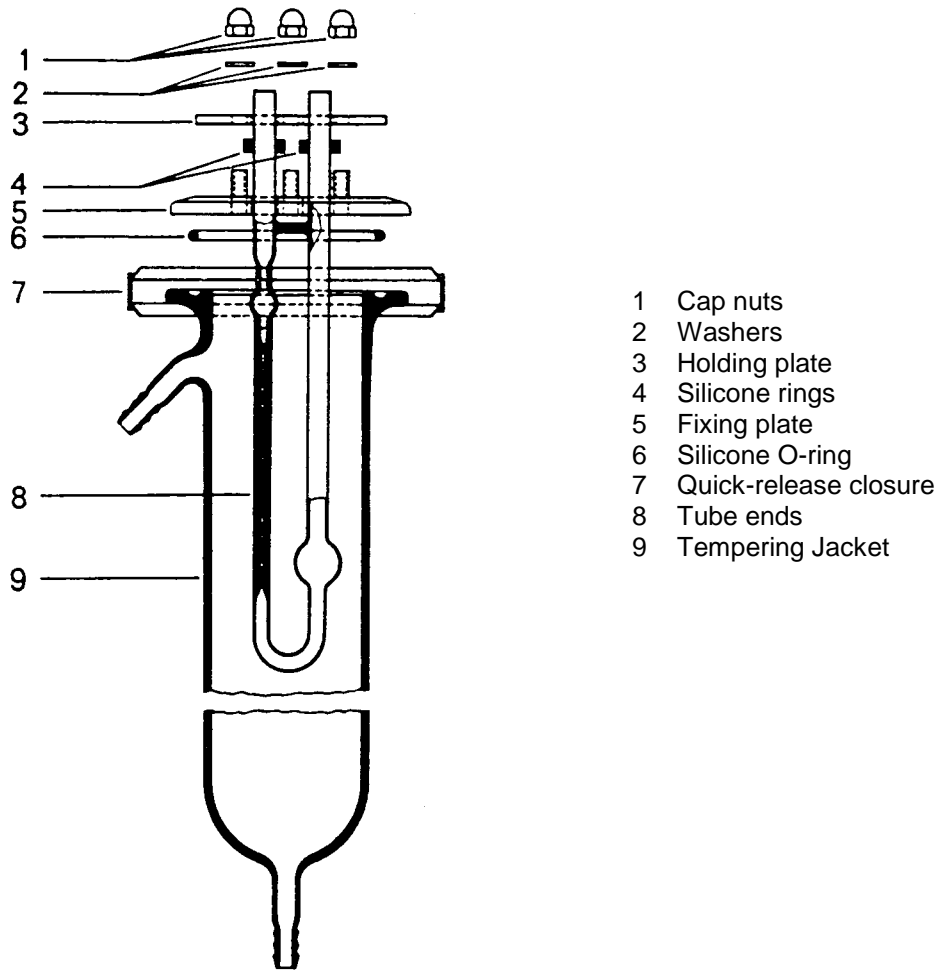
Explosion drawing Tempering Jacket for viscometer
